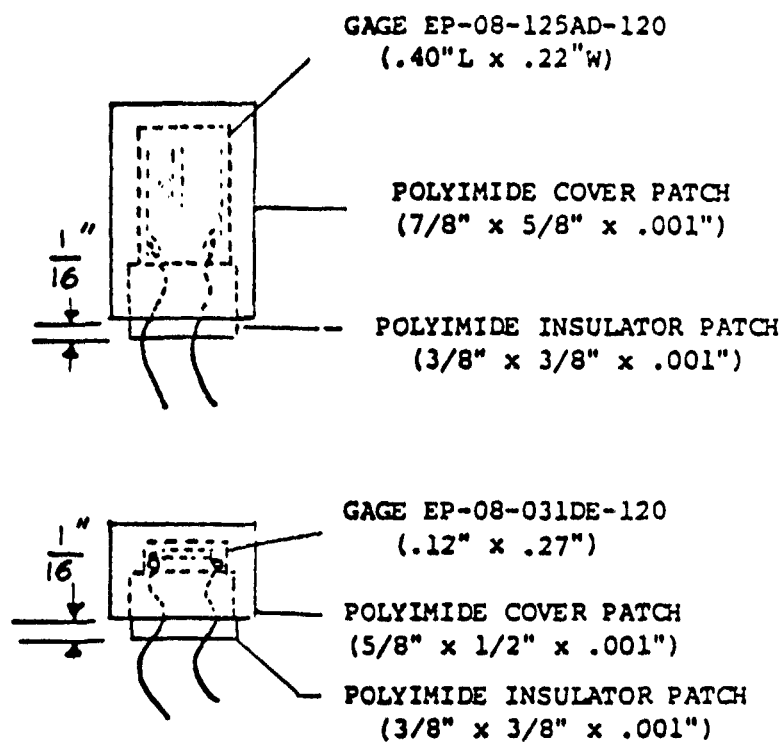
POLYIMIDE COVER PATCH DIMENSIONS AND LOCATION
